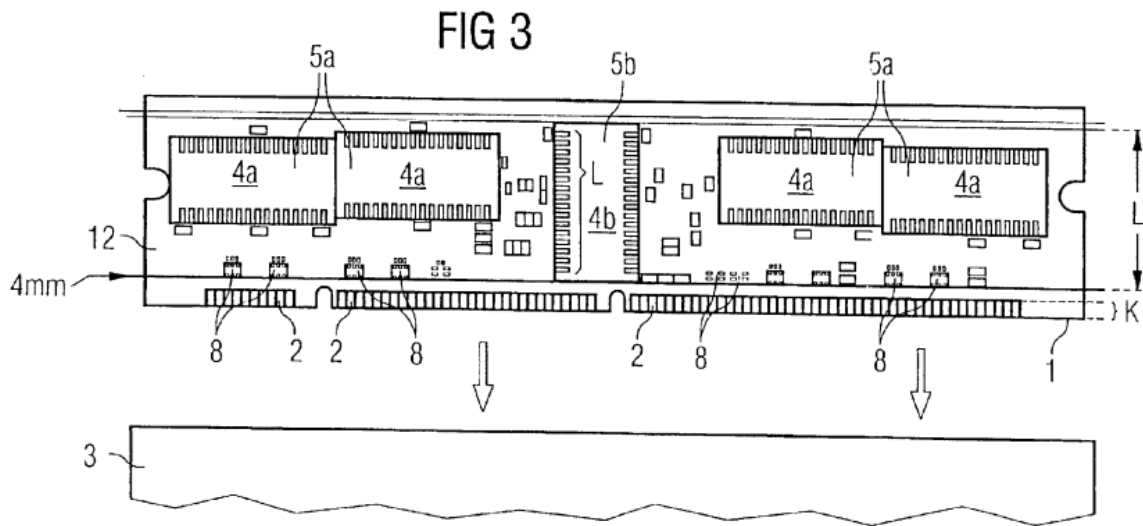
shows the rear side of a printed circuit board according to an embodiment of the ’414 patent. *Id.* at 5:13–14. In this arrangement, housings 5a of semiconductor memories 4a are arranged horizontally on printed circuit board 1, and only housing 5b of error correction chip 4b is arranged vertically. *Id.* at 6:19–28. Housing 5b is “brought up to [] contact
